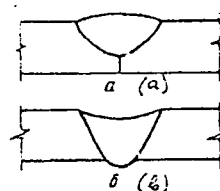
The shape of the first weld : (a) in double welding; (b) in single two-pass welding
